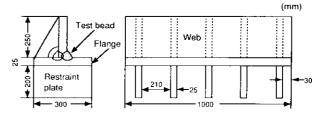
Restraint cracking test method for fillet welded joint with 25-mm-thick web
